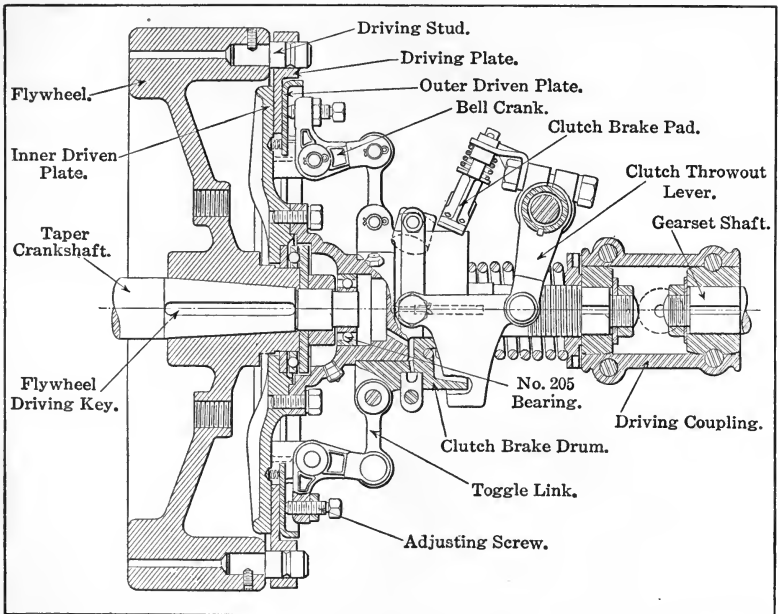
A Three-Plate Clutch Equipped with Friction Brake to Arrest Motion of Driven Member when Clutch is Released.
